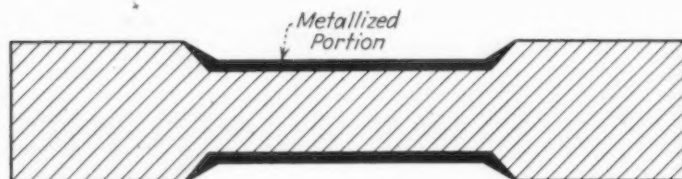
Tests for machineability of metallized coatings were made on steel rods, such as the one shown here, measuring 10 in. long and turned to 1/2 in. at the center. The rods were sprayed with steel to a depth of 0.010 in.
